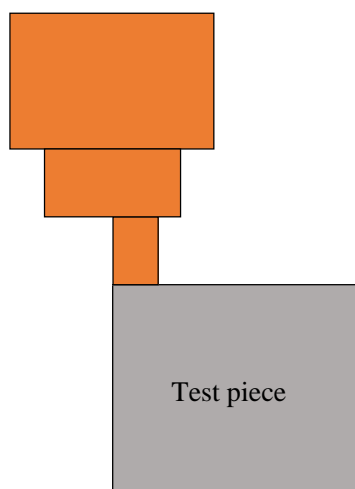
Illustration of setting of electrode and edge of test piece
